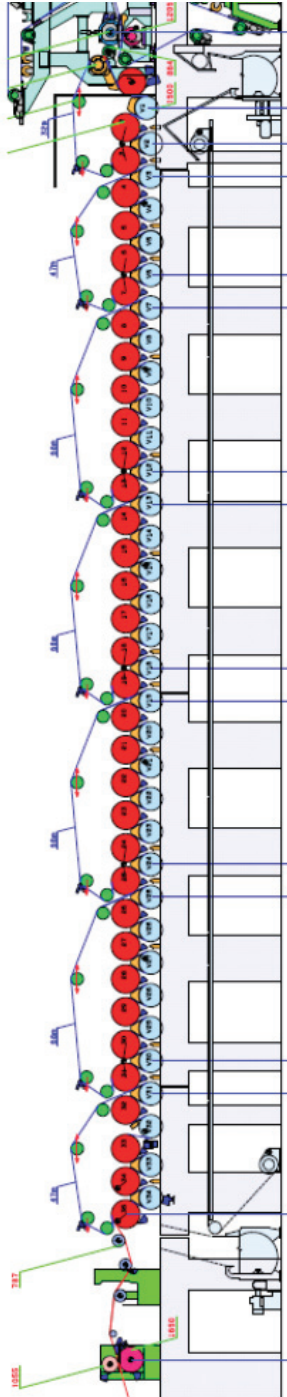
A cross-section view of the paper machine. Notice the route of the web through the system. (Courtesy of Metso).(See page 82, in [37].)
